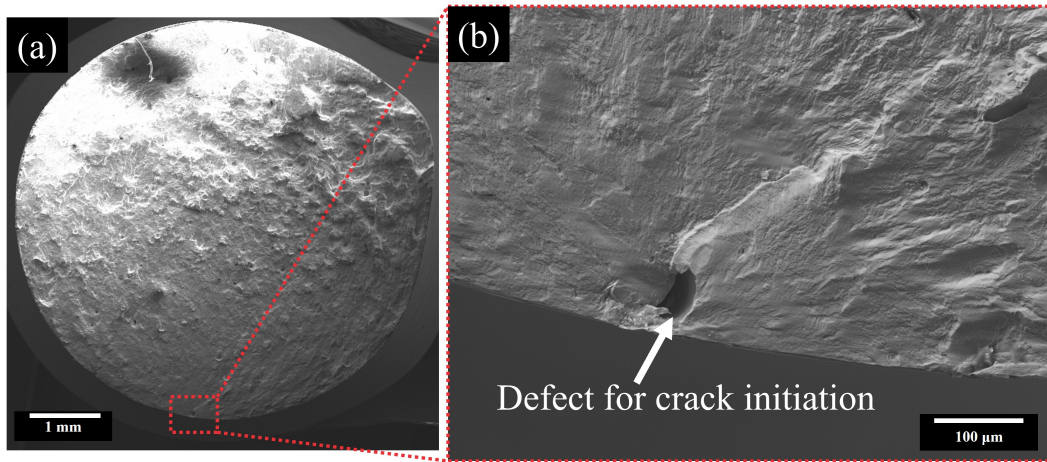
The fatigue fractography of R1 tested under 150 MPa, showing the killer defect size and location [121].
